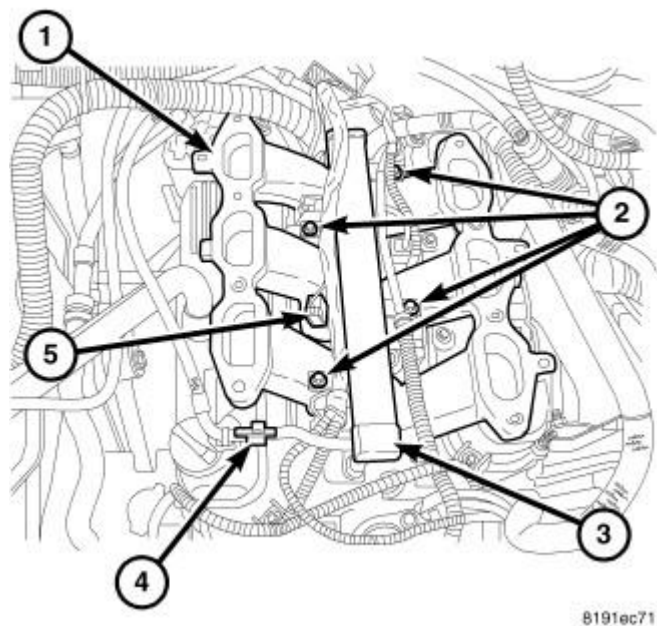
Fuel Injectors, Line, Rail & Fasteners 3.8L
